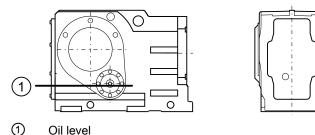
Oil level when using backstops in bevel helical gearboxes
